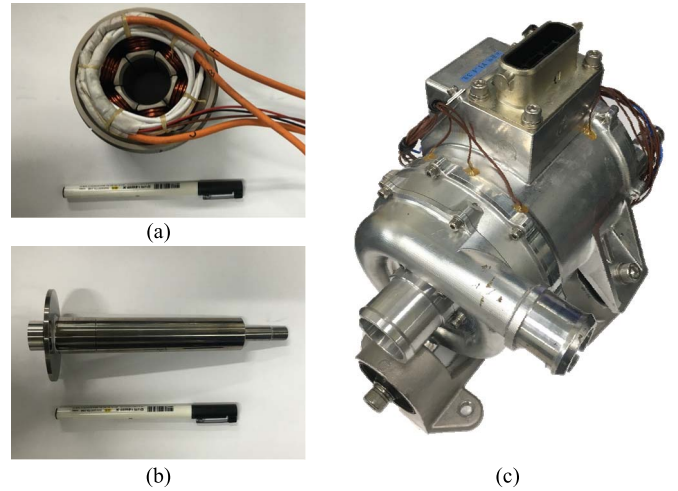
Prototype of the base model (a) stator, (b) rotor, and (c) compressor assembly.
